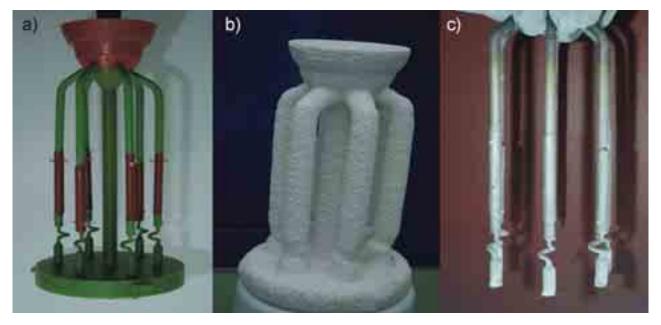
Photographs subsequent manufacturing steps of casting core models: a) set a model, b) casting mould, c) cast parts (test core cylinders)
